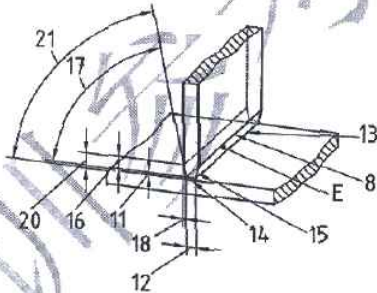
Preparation for double-bevel T-butt welds
